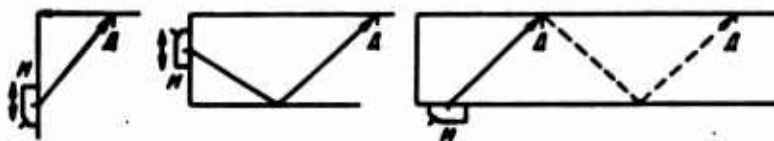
Detection of defects located near lateral surface using refracted shear UZK: M - searching head; D - defect.
